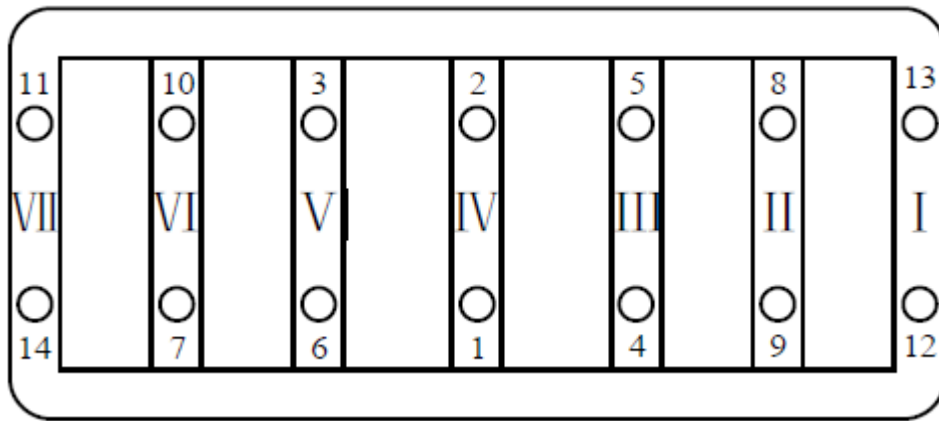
Tightening Sequence of Main Bearing Bolt
